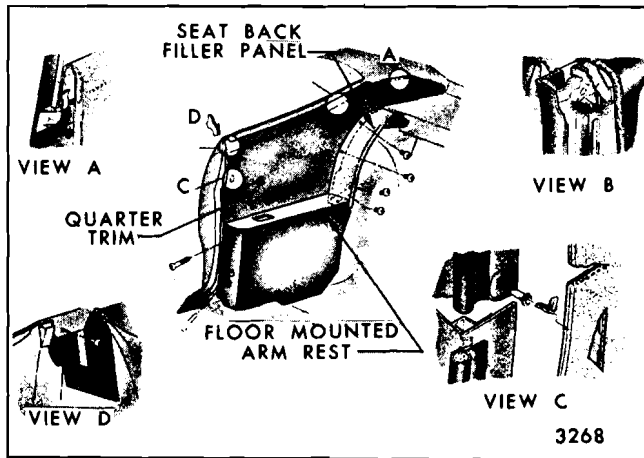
Rear Quarter Arm Rest and Trim Assembly - "A" Two-Door Styles
